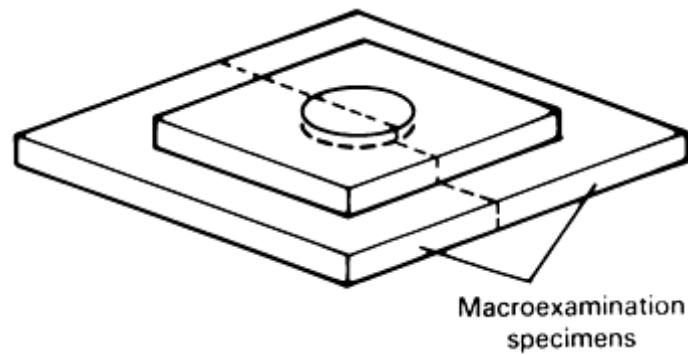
PLUG WELDS QUALIFIED BY GROOVE WELD TEST
